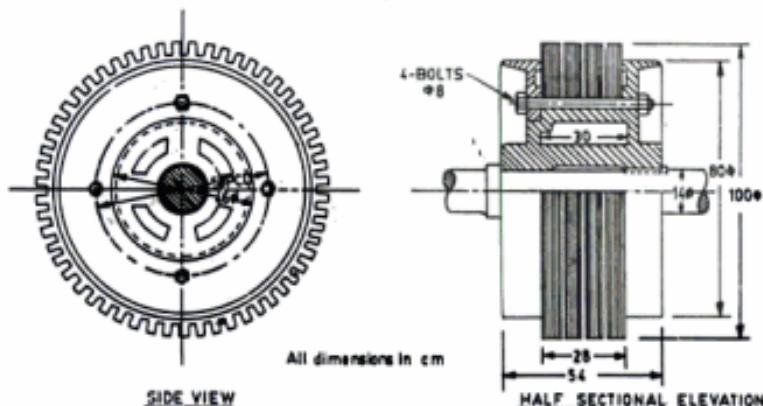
Side view and half sectional elevation of the armature of a d.c. machine
